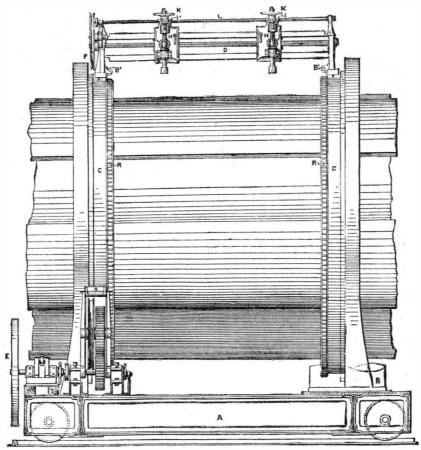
SIDE ELEVATION OF TUBE DRILLING MACHINE.
